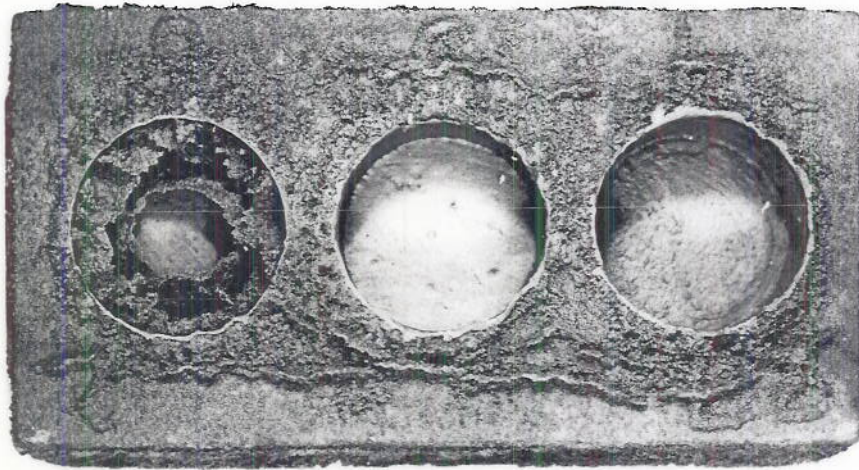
TEST CASTING SHOWING RESULTS PRODUCED BY TEST SPECIMENS OF SAND, SILLIMANITE AND PERICLASE.
